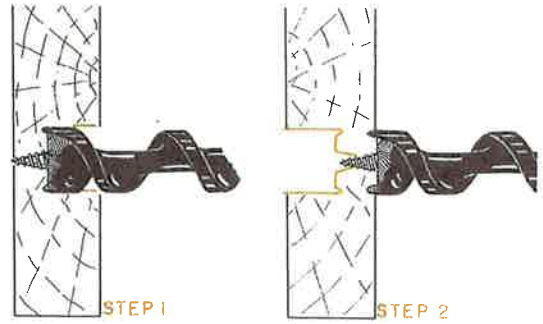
Step 1: Correct procedure in boring a hole. Step 2: Boring a clean-cut hole.
